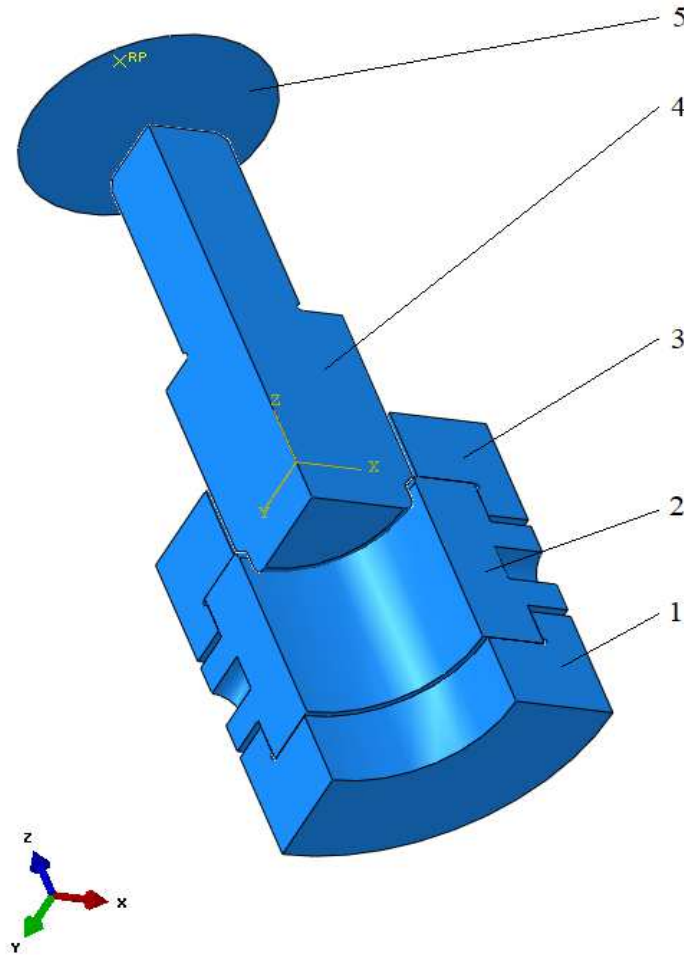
Geometrical representations of the parts that make up the finite element model of the shrinkage process (1 – support ring; 2 – pressing ring; 3 – centering ring; 4 – pressing hub; 5 –work surface of the turntable)
